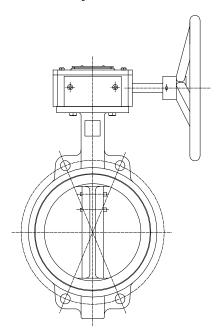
GEAR OPERATOR INSTALLATION POSITION
